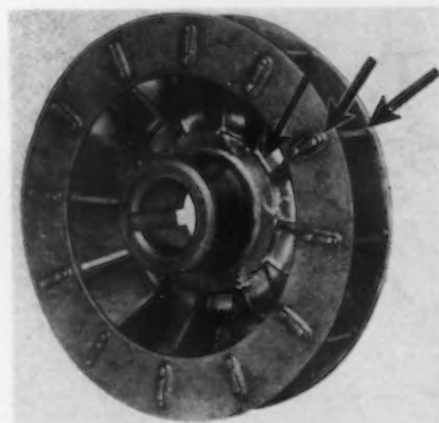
Formerly entirely riveted, this fan-wheel assembly is now both riveted and furnace brazed, with complete elimination of service failures.
